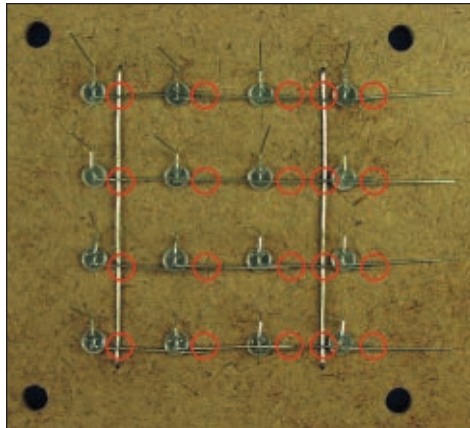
Layer 0's LEDs loaded into the jig base; red circles show the solder joint points.
